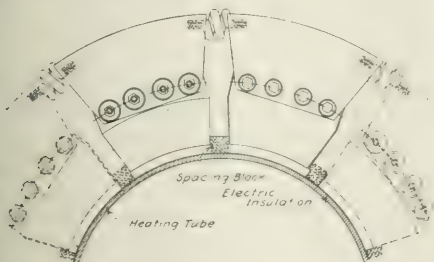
THERMO-ELECTRIC UNITS ASSEMBLED ON TUBE
